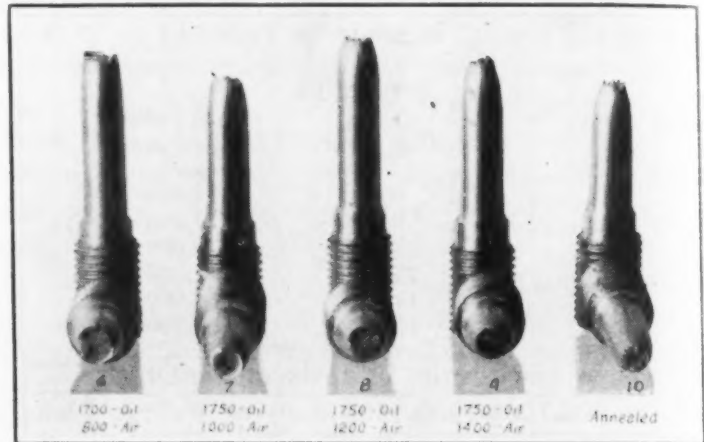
Fractured Test Specimens of Material 6725 When Heat Treated as Shown.
